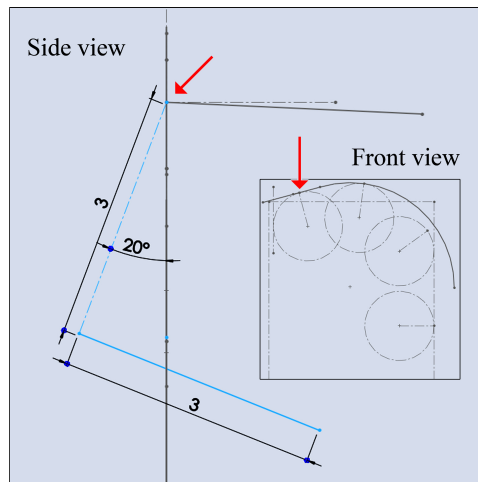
2D sketch of vector specifying 20° back rake for the center cutter. Red indicators mark the same point on the sketch from a side and front view. The bottom blue line define cutter socket trajectory. Dimension in mm.
